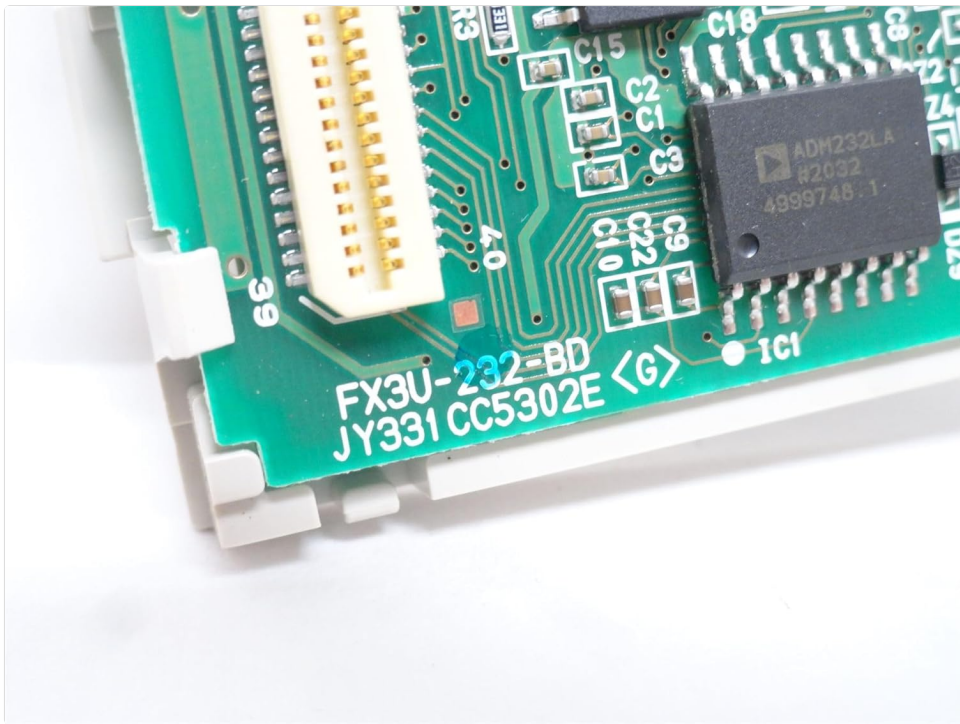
Detailed view of the Mitsubishi FX3U-232-BD circuit board, highlighting the model number printed on the PCB and various electronic components.
